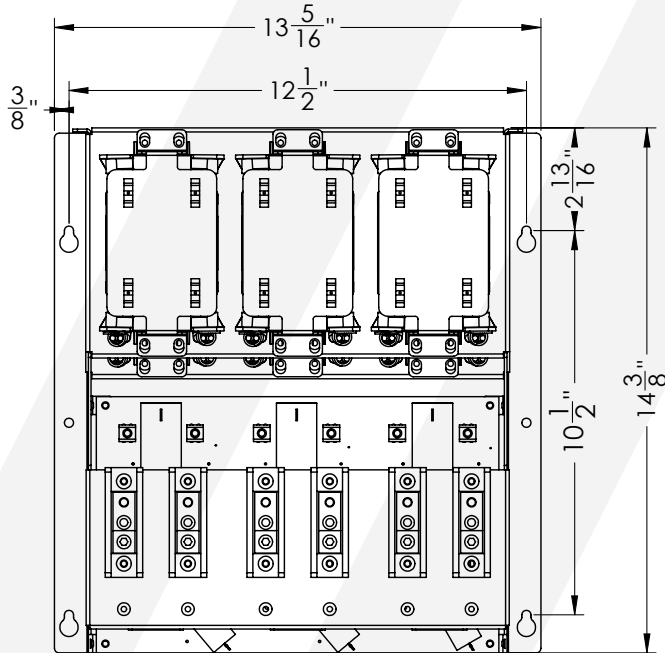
HP E3 Enclosure, Line Drawing
